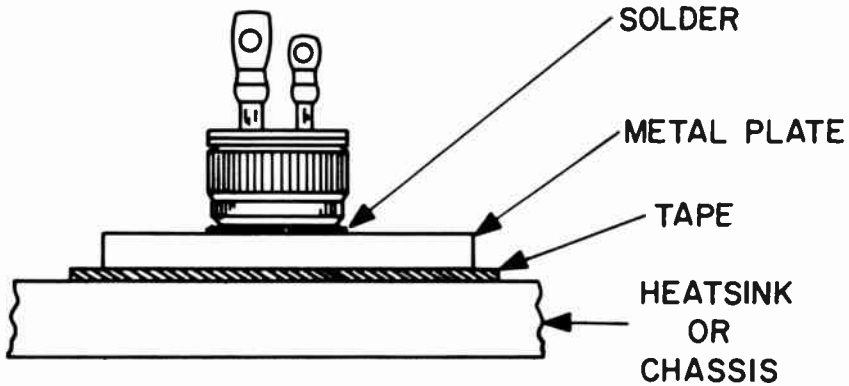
MOUNTING THE PRESS-FIT PACKAGE WITH TAPE INSULATION
